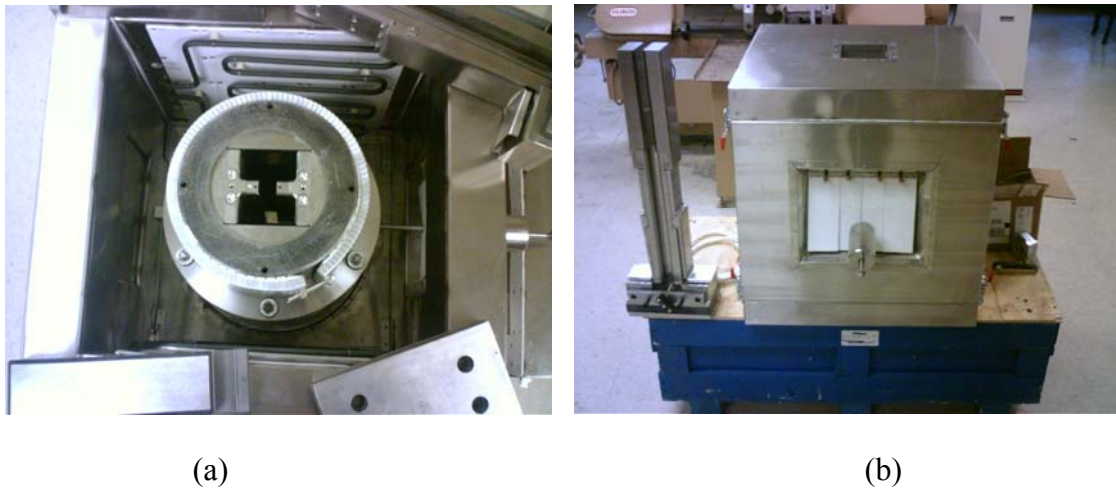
a) Replaceable inserts for ECAE processing of billets with different cross sections b) ECAE furnace for isothermal extrusions up to 600°C.
